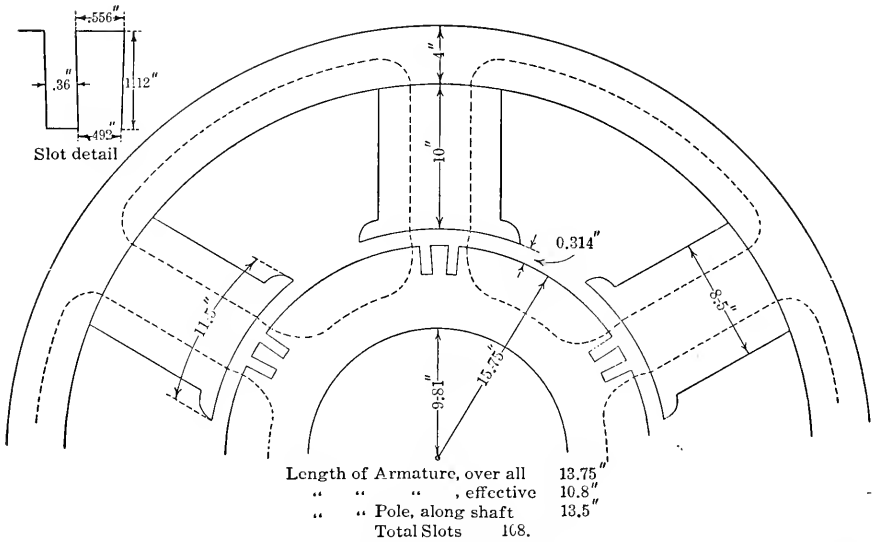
Giving the essential dimensions of the magnetic circuits of a modern multipolar machine; this is the kind of a sketch the designer works from.
